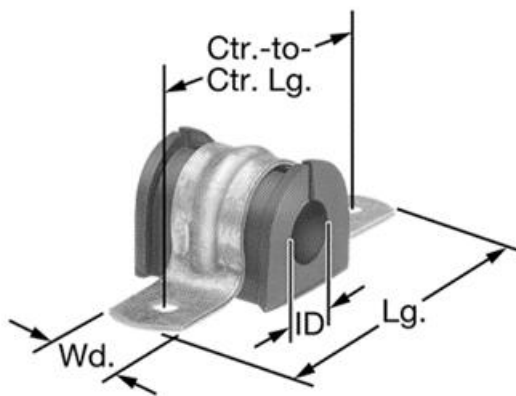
Rubber bushing, with a 3/8 in hole that would hold the Anti Roll Bar in place
